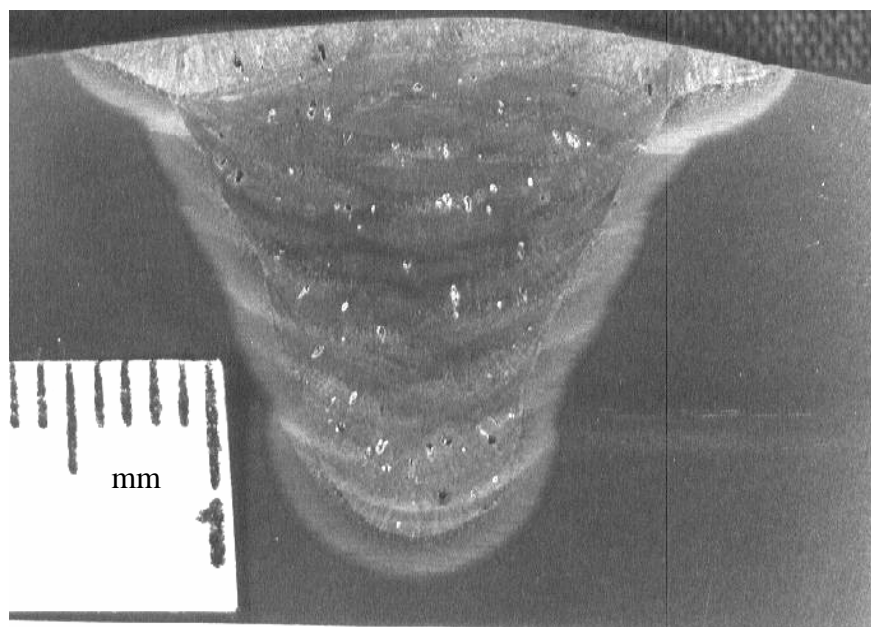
Macro-section and top bead microstructure from 1T2B2 V-groove weld.
